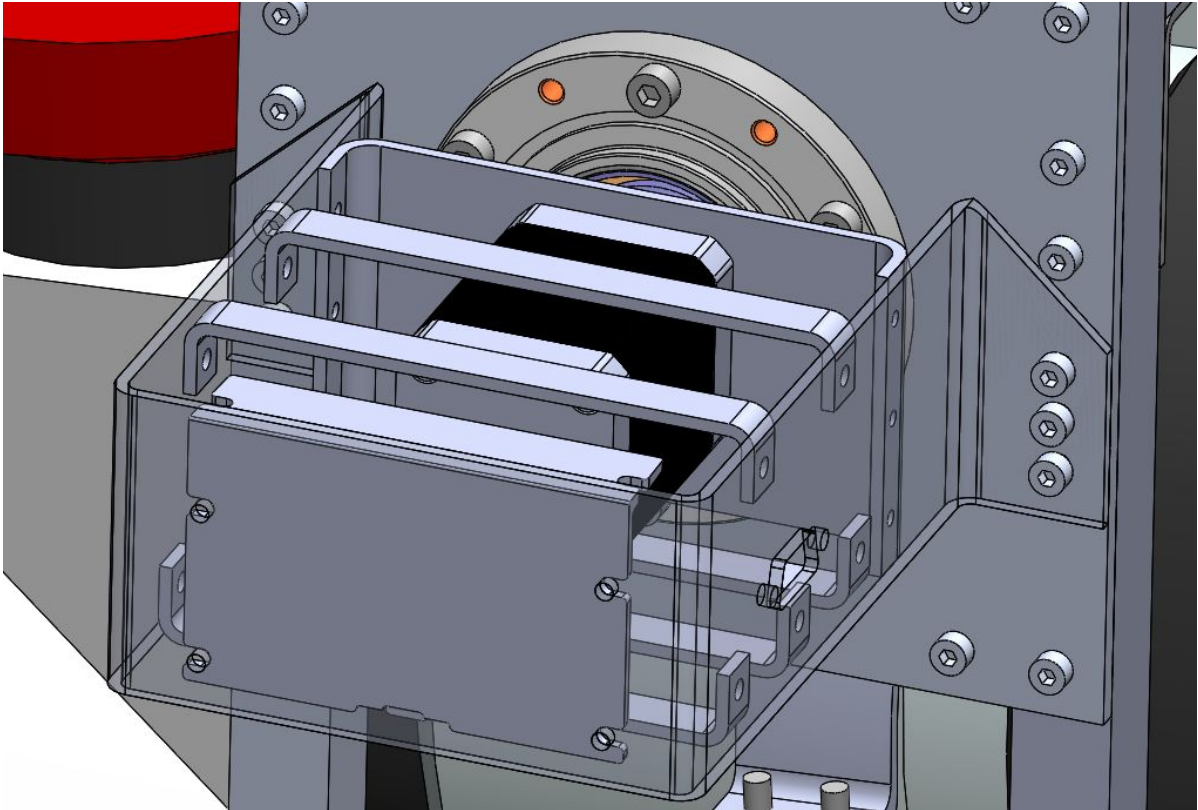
Close-up 3D CAD of pitch motor housing.
